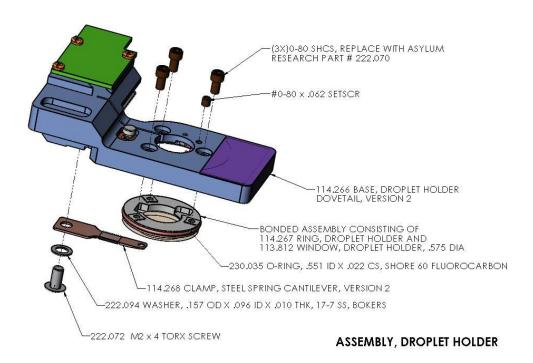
Droplet Cantilever Holder Assembly Overview
